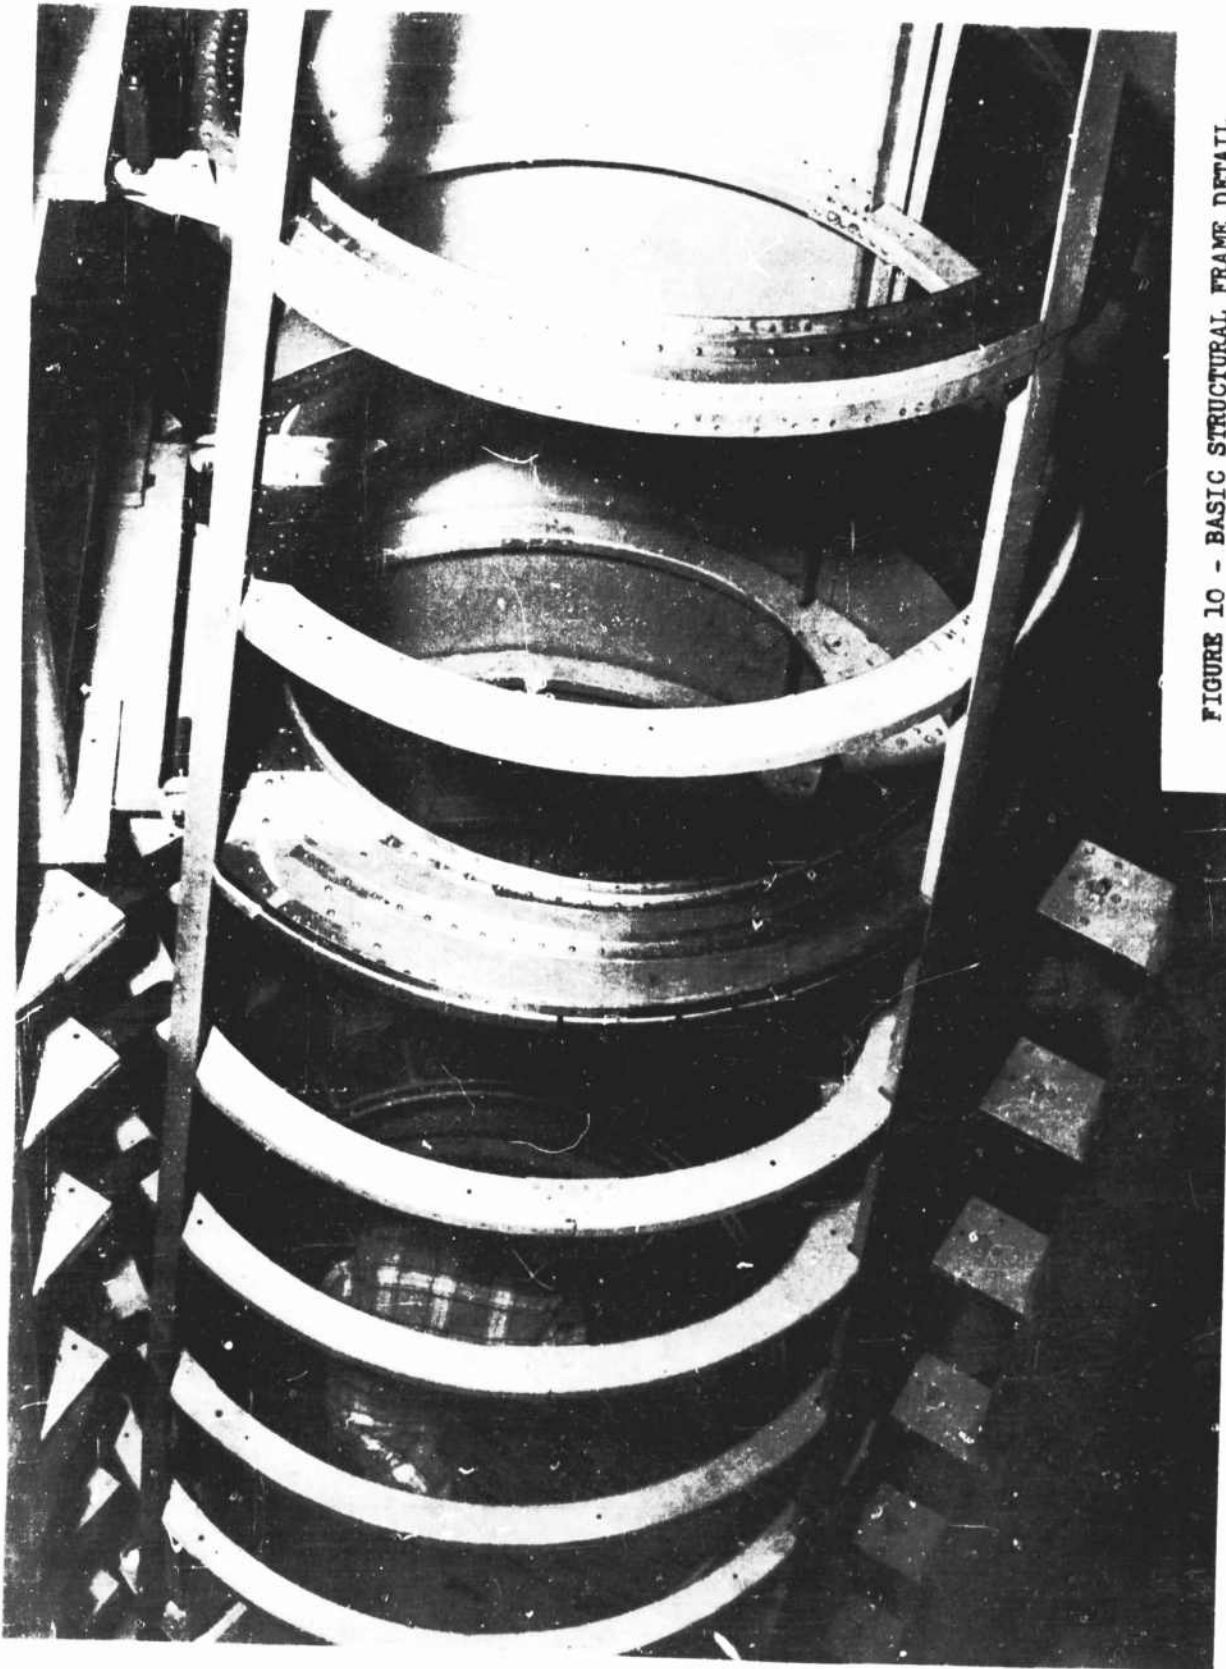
BASIC STRUCTURAL FRAME DETAIL
